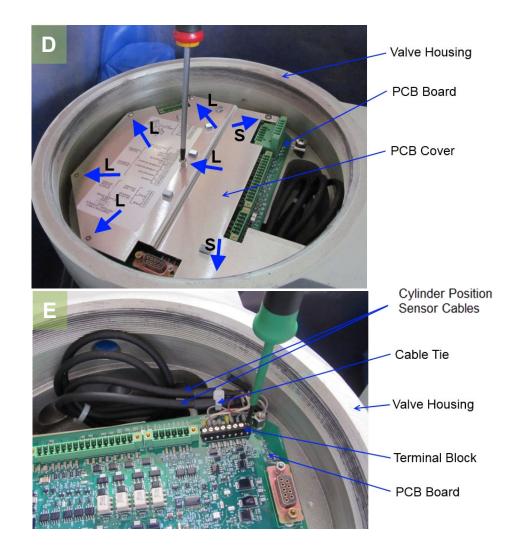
Removing the PCB Cover and Cylinder Position Sensor Wires
